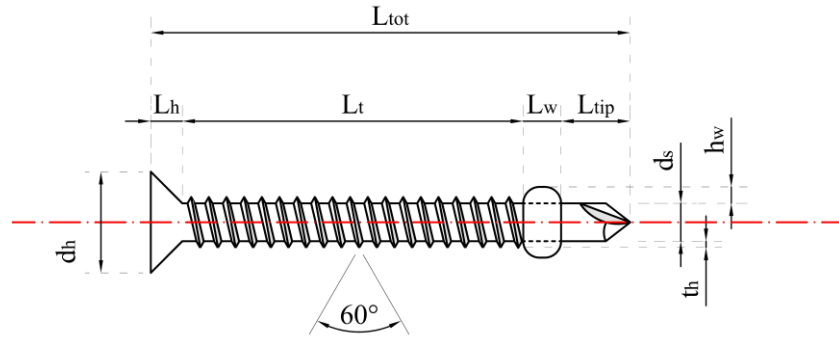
Indicative sketch for the fastener geometry (unit – millimeters)
